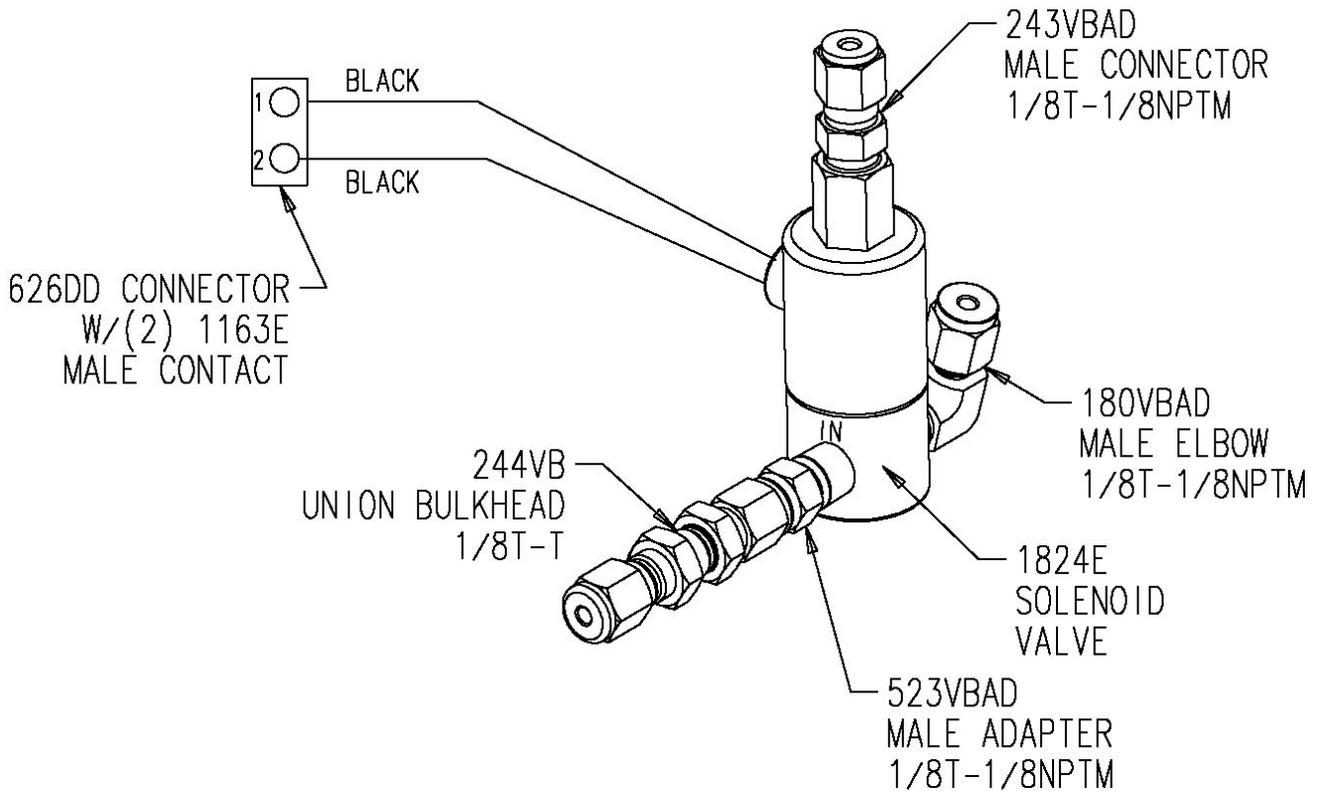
6400 Water Tank and Jacket Cooling Solenoid
